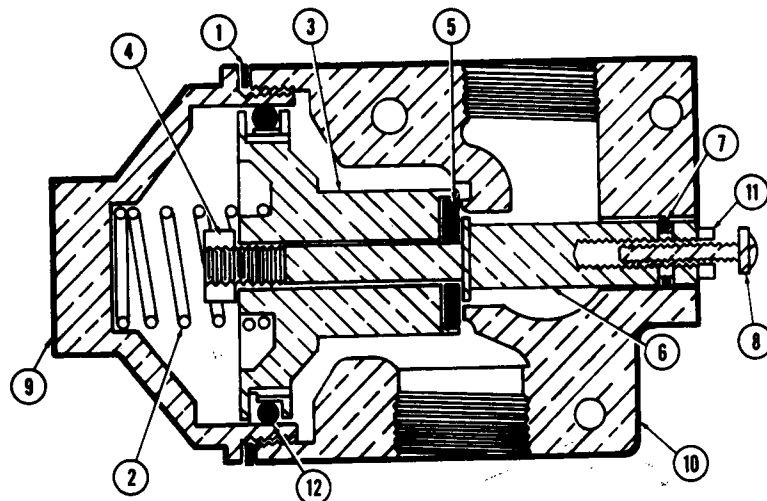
A. FLUSH VALVE ASSEMBLY WITH ORANGE CAP (466160-001).
